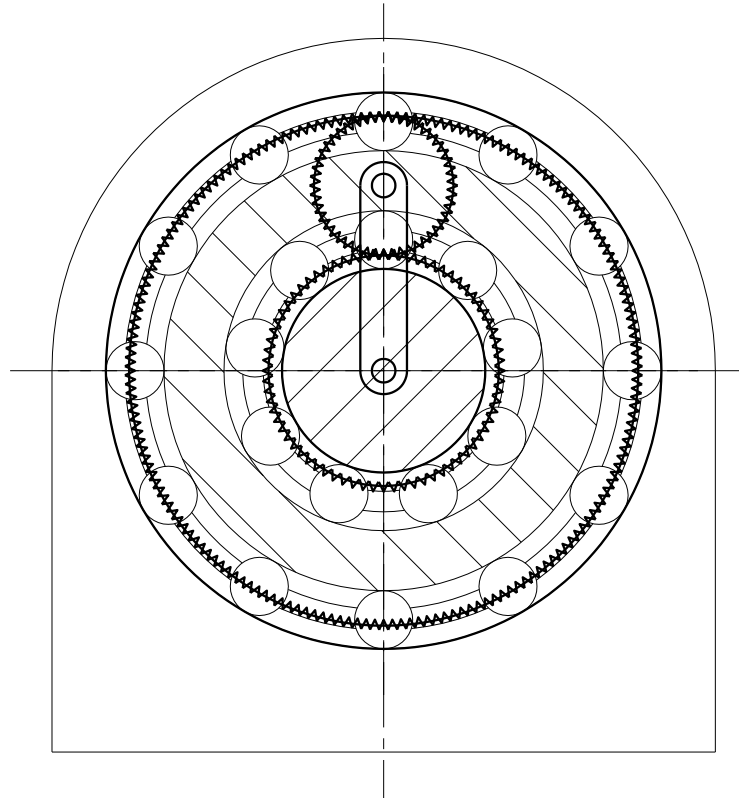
Planetary gear system used for running diagnostics on shaft or frame bearings
